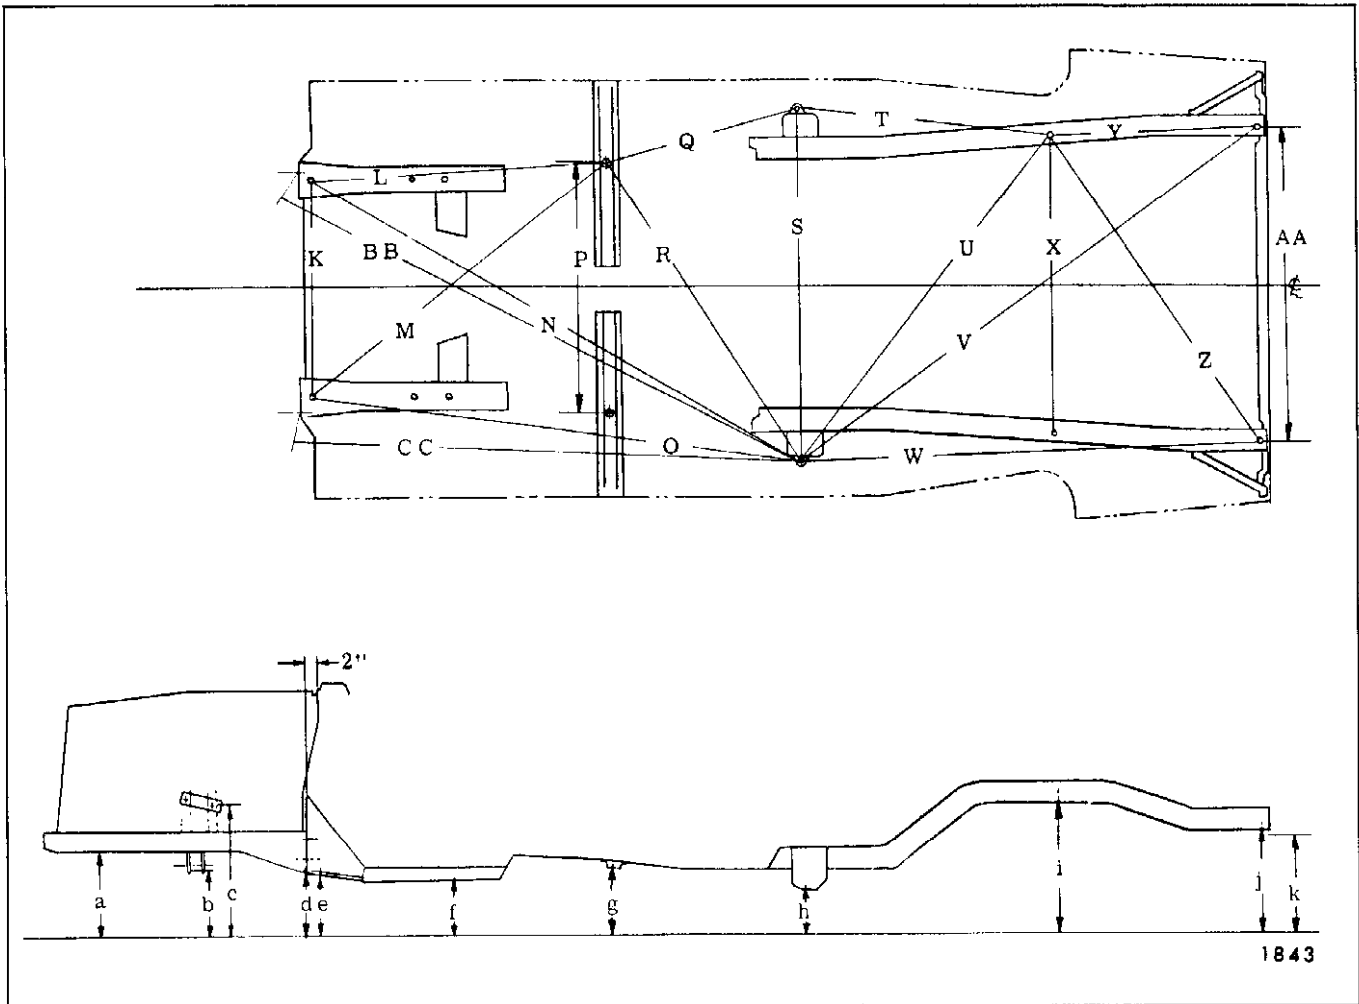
Horizontal and Vertical Dimensions (Body Assembly)
